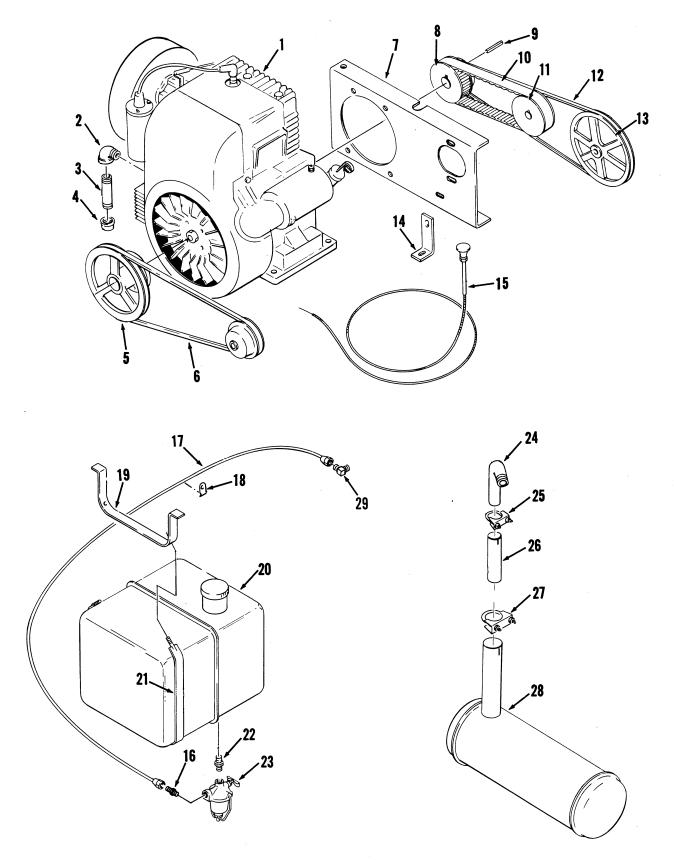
ENGINE, FUEL TANK, MUFFLER, & RELATED PARTS
